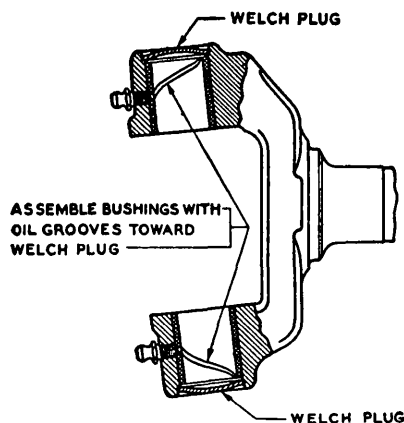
Correct assembly of bushings in knuckle. 1940-52
